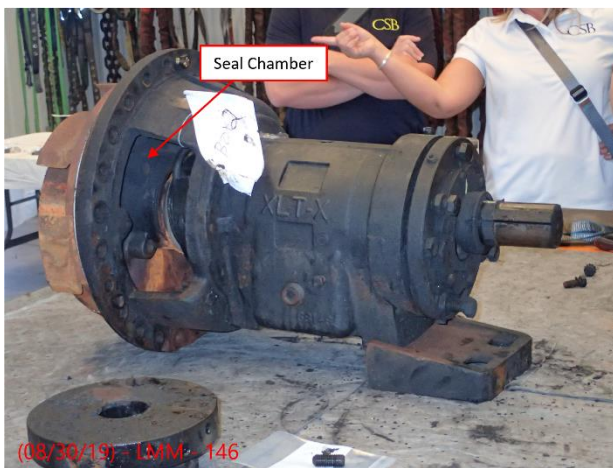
Seal Chamber Assembly Showing Detached Gland
